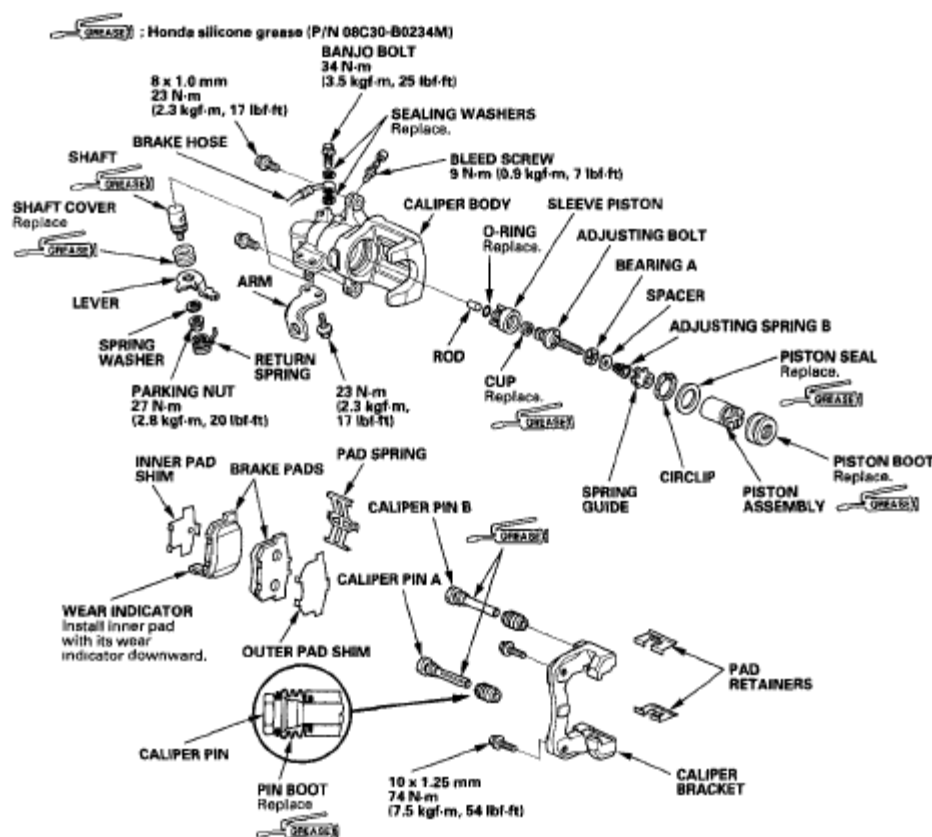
Exploded View Of Rear Brake Caliper Overhaul (With Specifications)
